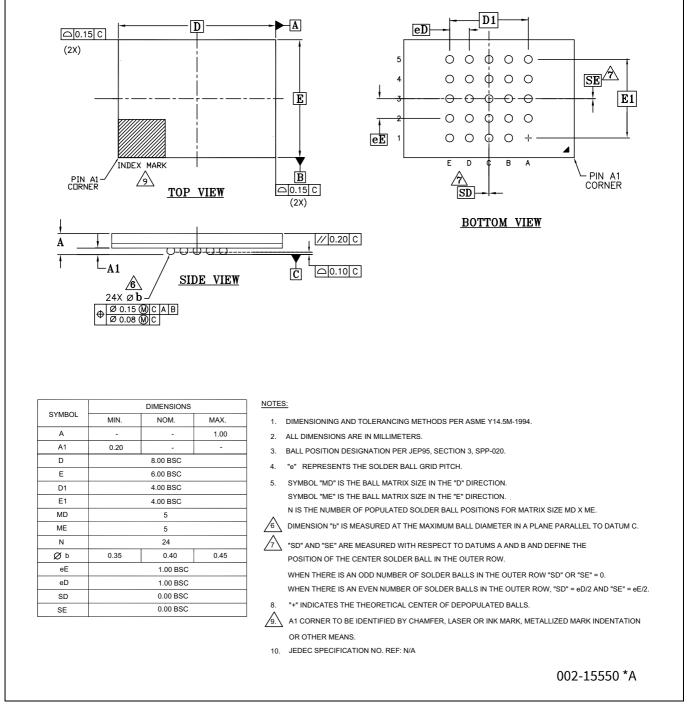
24-ball BGA (8.0 × 6.0 × 1.0 mm) package outline, 002-15550
